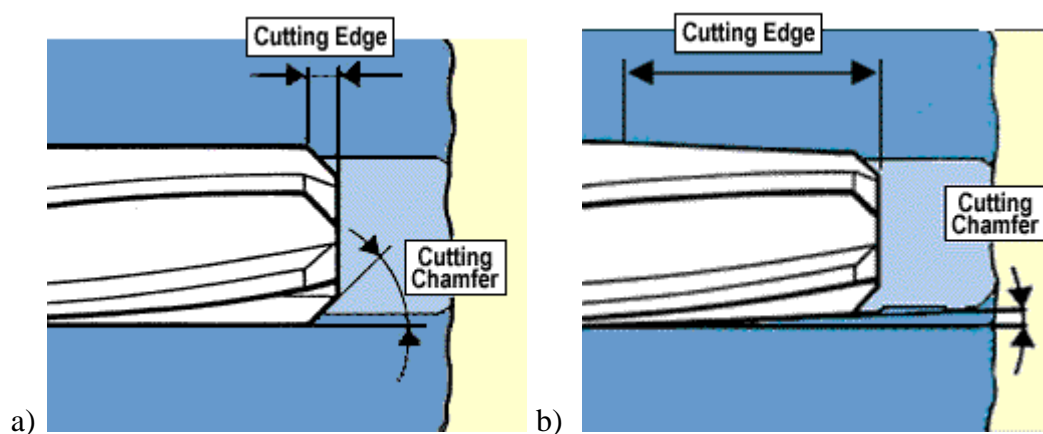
a) Machine Reamer; b) Hand Reamer [35]
